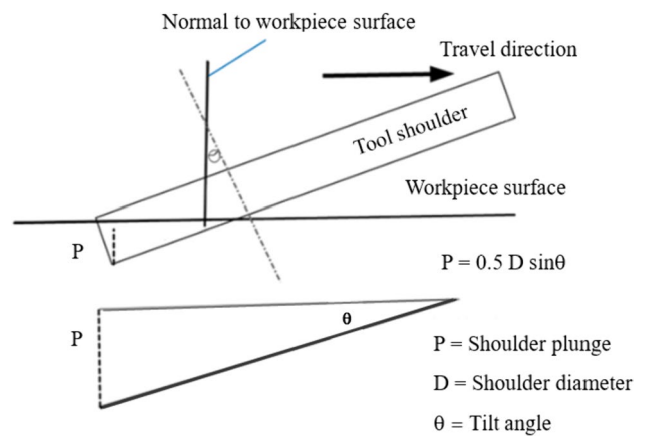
Cross-sectional view of a tool tilt during FSW [19]
